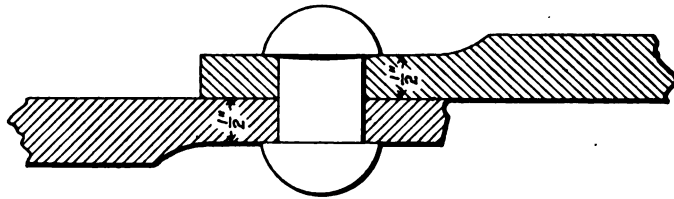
CIRCUMFERENTIAL JOINT FOR THICK PLATES OF HORIZONTAL RETURN TUBULAR BOILERS
